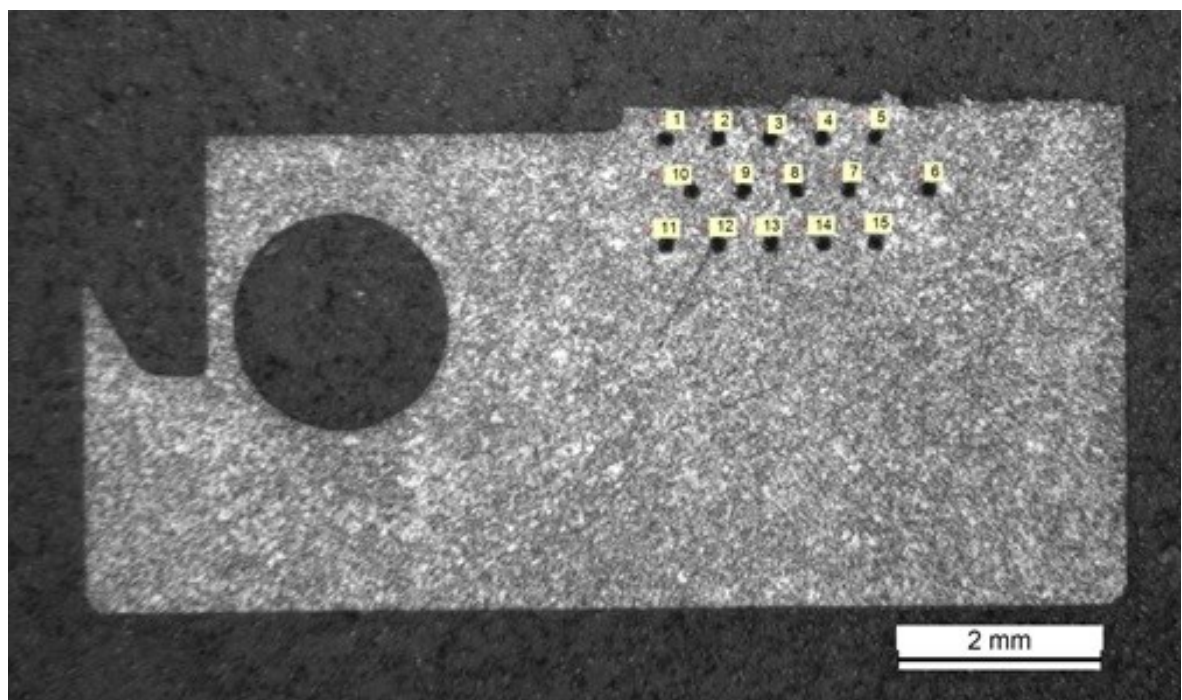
Locations of hardness measurements of Ringhals 4 surrogate weld metal.
